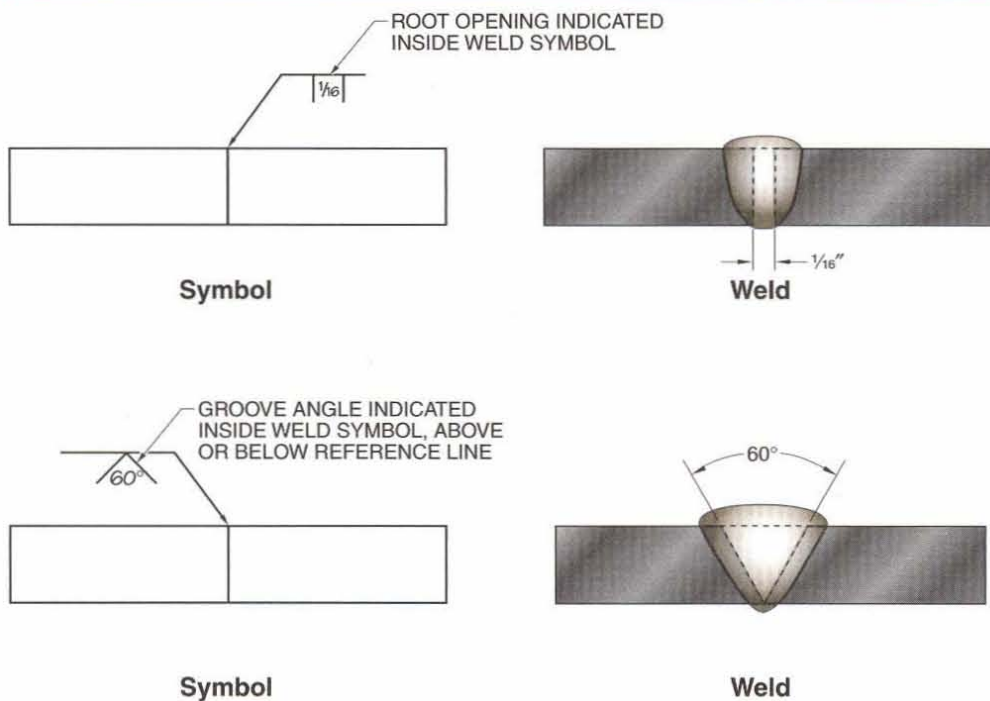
The root opening of a square butt joint is indicated inside the weld symbol. The groove angle of a beveled groove joint can be indicated above or below the reference line.
